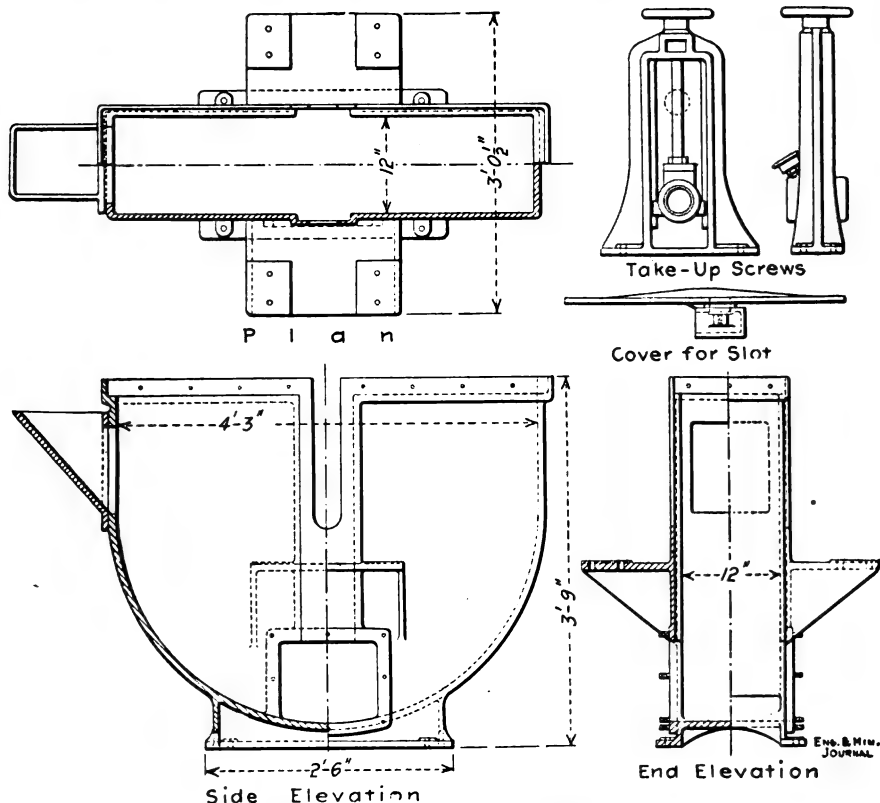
STEEL ELEVATOR BOOT WITH OUTSIDE TAKE-UP BEARINGS.
